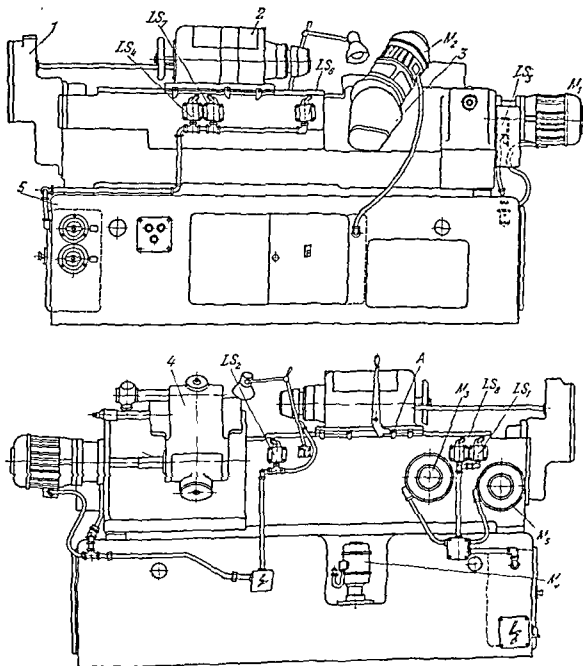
Semiautomatic drill-flute milling machine, model 6793Y
